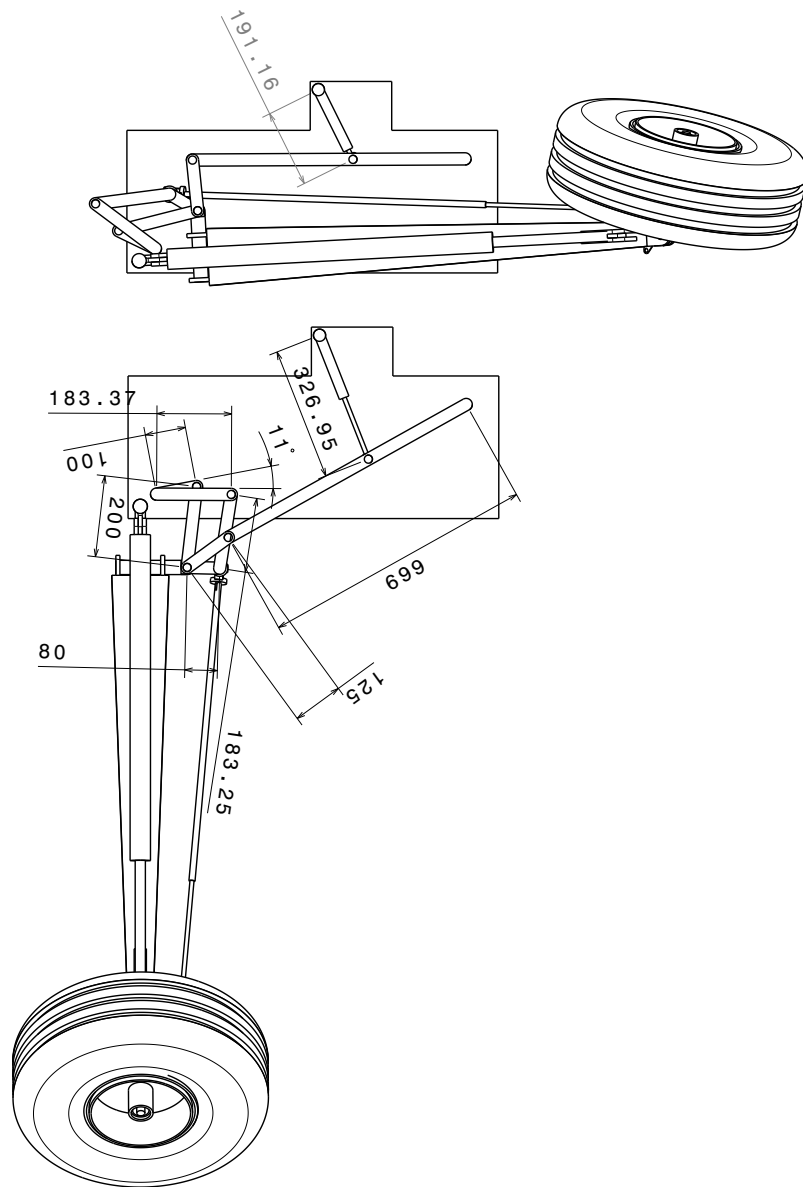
Main landing gear kinematic system dimensions, dimension in [mm]
